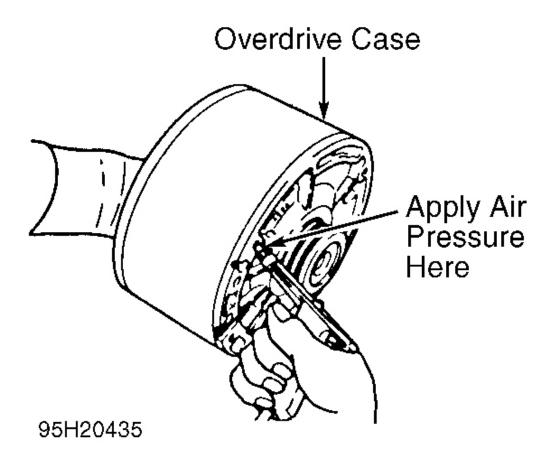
Removing Brake Piston From Overdrive Case Courtesy of ISUZU MOTOR CO.
